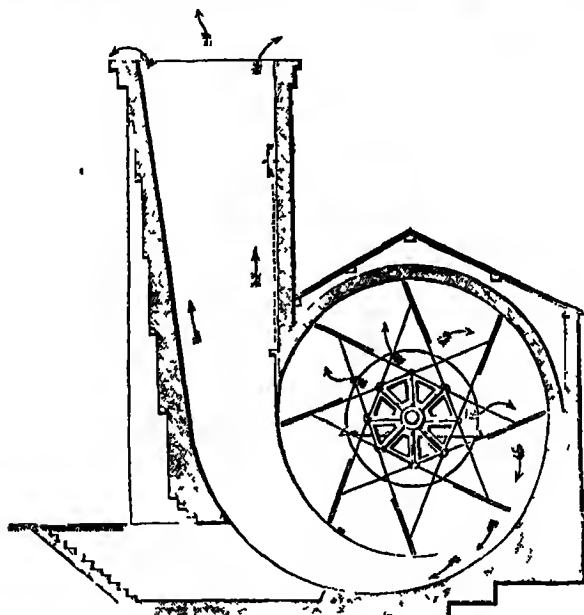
Guibal's fan Scale, 1 inch to 20 feet
